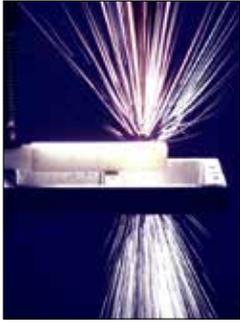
A 4 mm thick sample of Y-TZP Zirconia being laser machined by a single Nd:YAG laser pulse.
